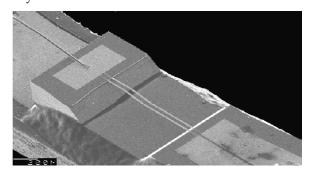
CONNECTED AND GLUED WIRES ON THE PRINTED CIRCUIT BOARD
